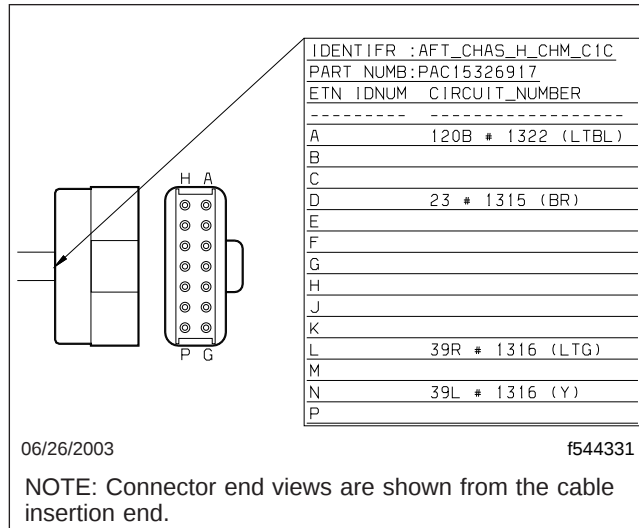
, Chassis Module Connector C1 Pinouts (typical)
